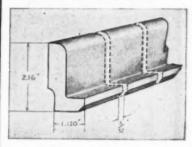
Dimensions and details of the workpiece being slotted in Fig. 5.
